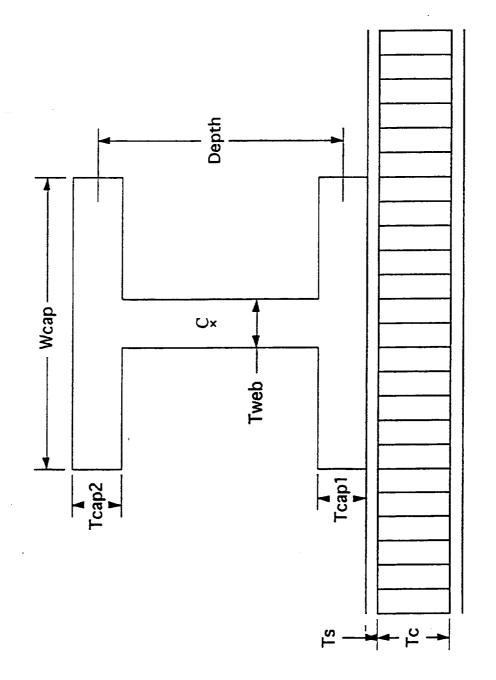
Honeycomb Panel and I-Beam Cross-Section
